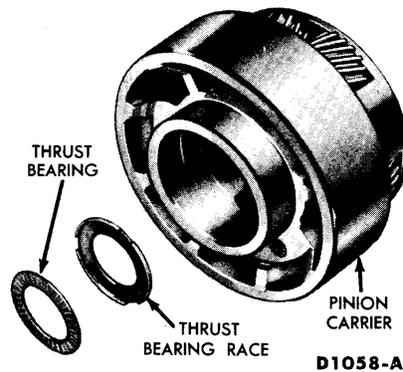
Primary Sun Gear Rear Thrust Bearing
